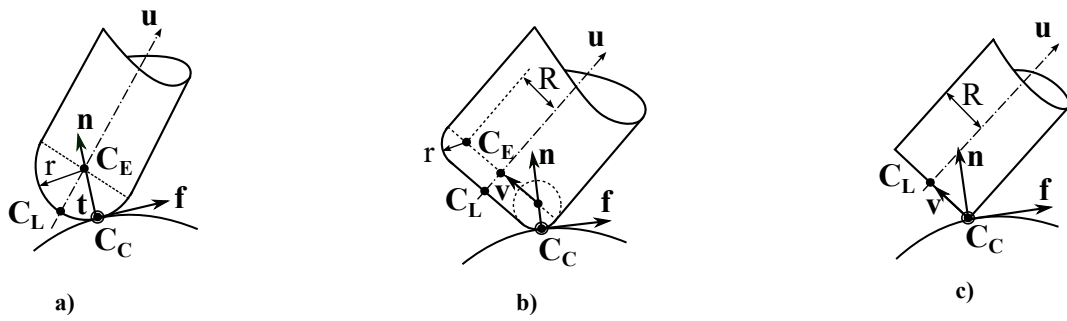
Point milling with a) hemispheric tool; b) toric tool; c) cylindrical tool
